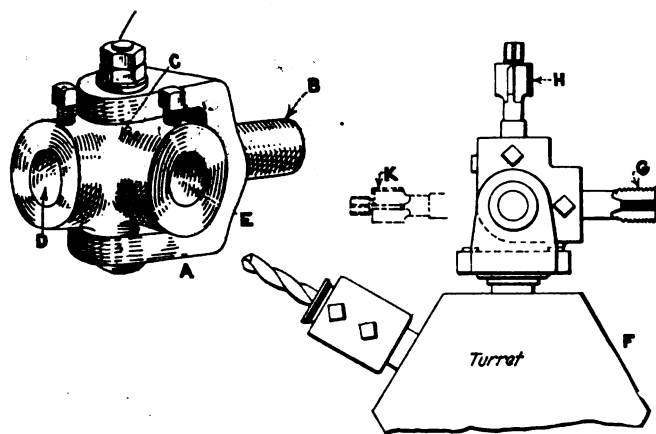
ATTACHMENT TO HOLD TWO TOOLS ON ONE TURRET FACE
